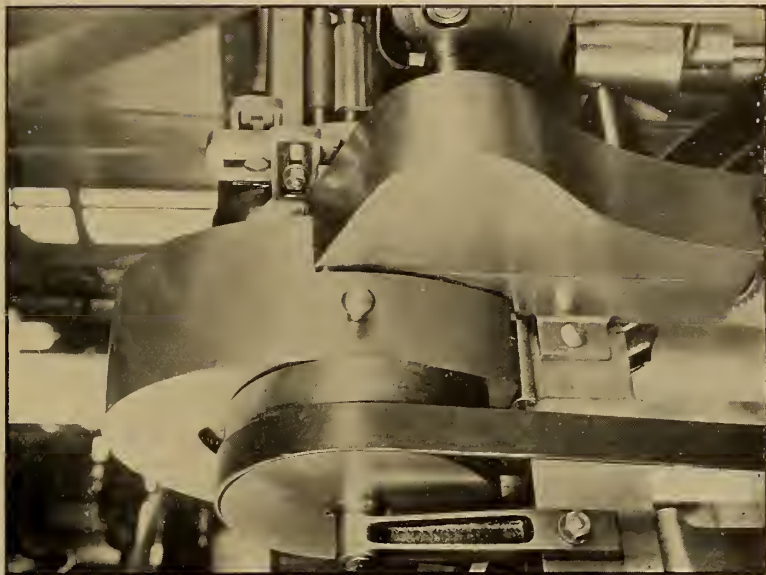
GUARDS ON ROLLER WHEELS ON DRAWING FRAME
